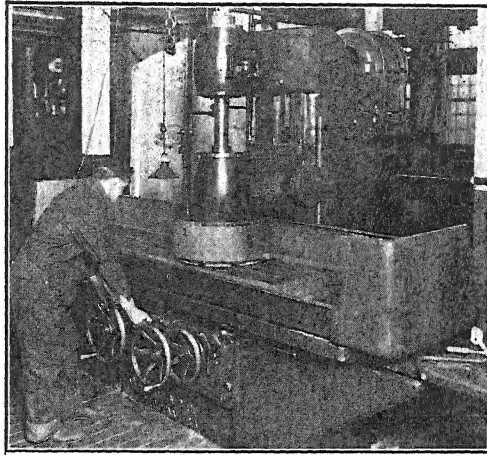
High-Carbon-Steel Planer Knives Being Surface Ground on a Pratt and Whitney Reciprocating-Type Vertical-Spindle Surface Grinder Using a Segmental Wheel.
